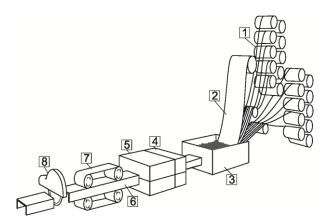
Poltrusion process scheme: 1 – reinforcement fibres, 2 – surfacing fabric, 3 – resin soaked fibre, 4 – dies, 5 – formation and cutting, 6 – element, 7 – pull mechanism, 8 – cutting elements
